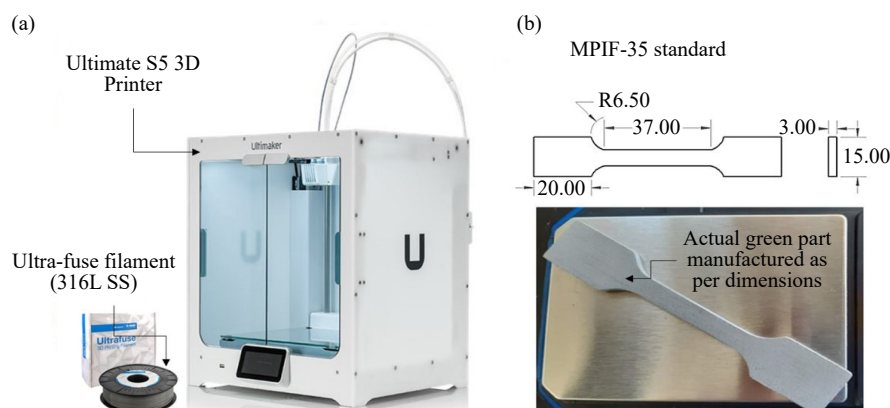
Green part manufacturing illustration: (a) FDM 3D printing setup; (b) green part geometry and actual 3D printed part
